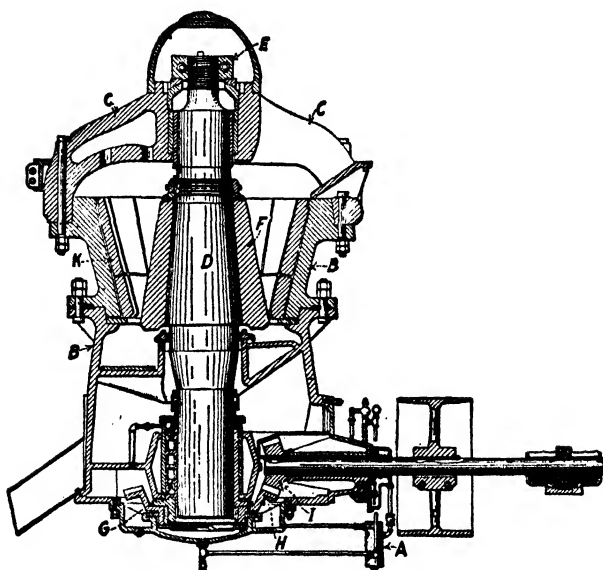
Sectional view of a gyratory crusher. (From C. E. Locke.)
